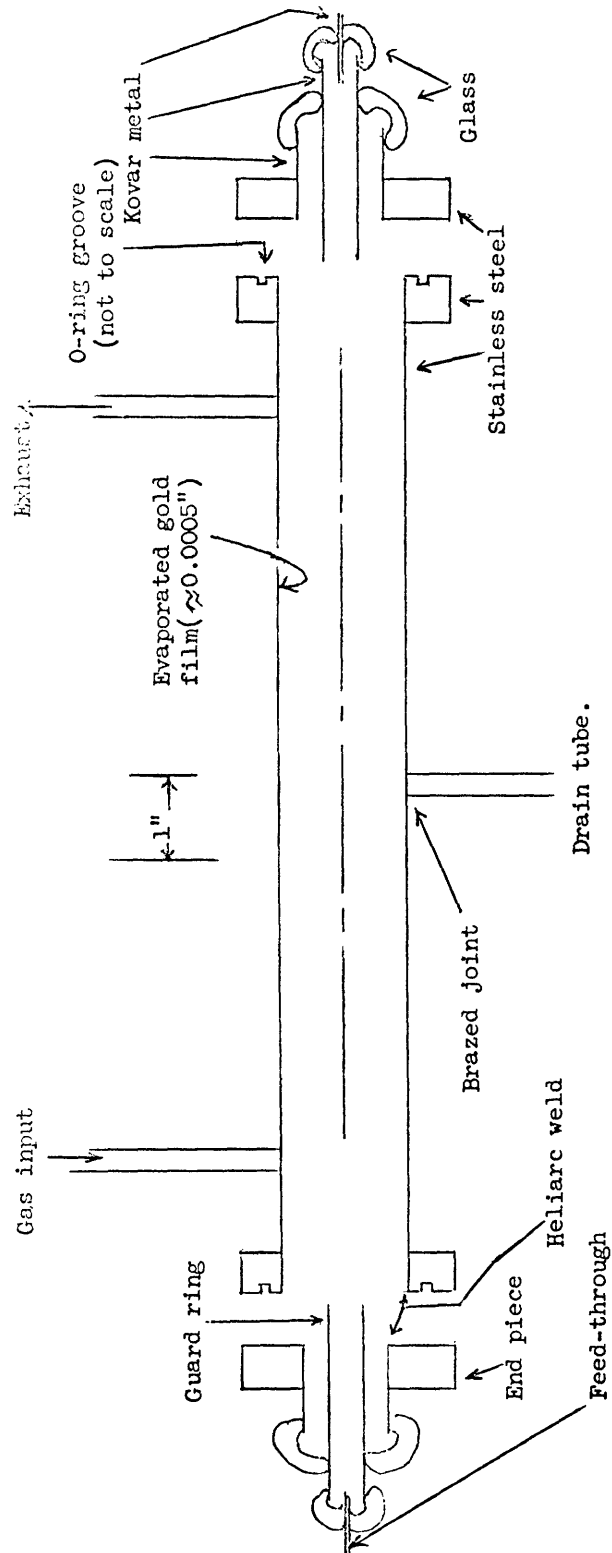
Proportional counter. The center wire (0.002-inch nickel) is soft-soldered through the center of the feed-through in each end piece. The end pieces are held to the main body of the counter by stainless-steel bolts.
